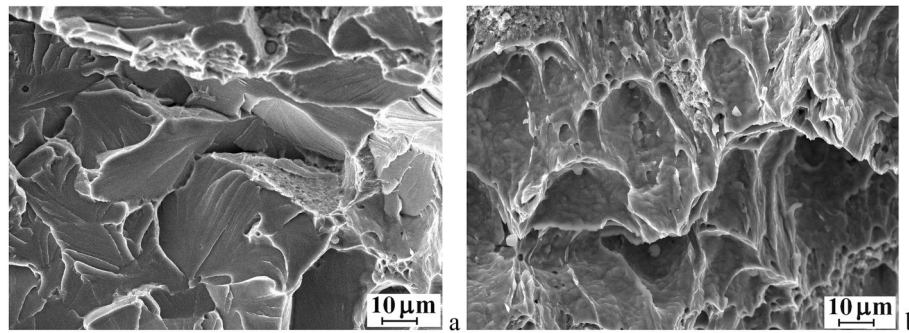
Micrograph of the impact fracture surfaces of welded metal at +20°C (a) and welded and annealed metal at -40°C (b).
